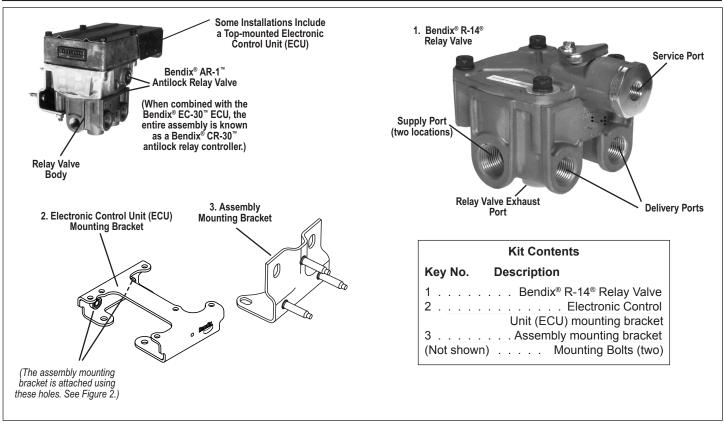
BENDIX® AR-1™ ANTILOCK RELAY VALVE REPLACEMENT KIT
